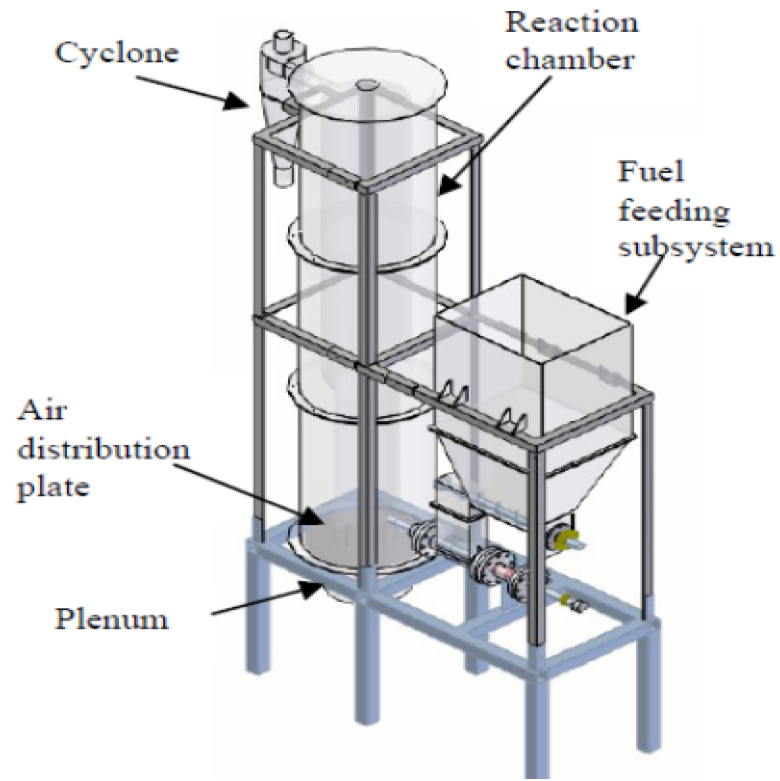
3D-assembly drawing of fluidized bed gasifier for saw dust
